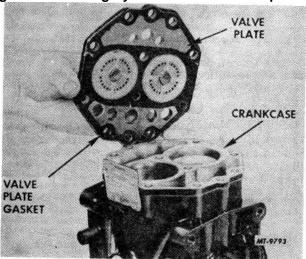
Removing Valve Plate Remove rear bearing housing and 0-ring seal, Fig. 17.
